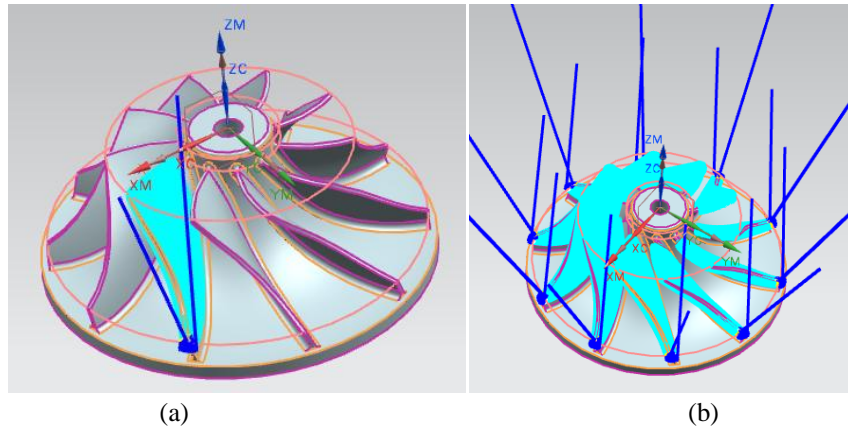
finishing process strategy (front view) of 27mm diameter impeller
